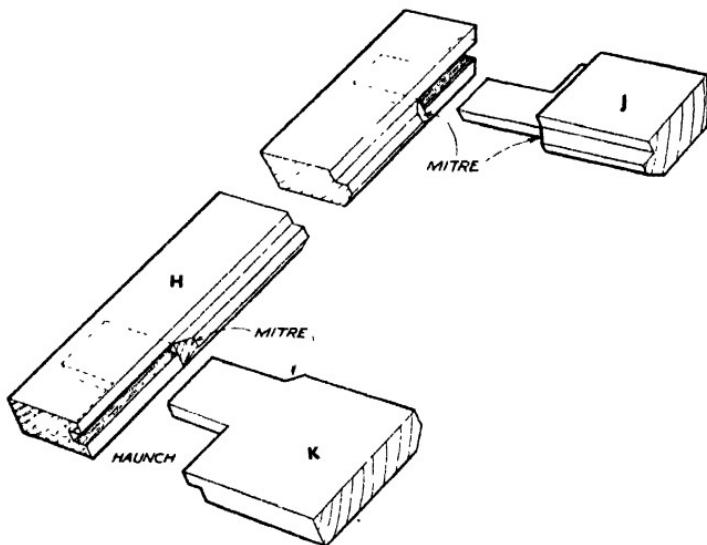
ROOF JOINTS. NOTE THAT GLASS RESTS ON BOTTOM RAIL (K).
